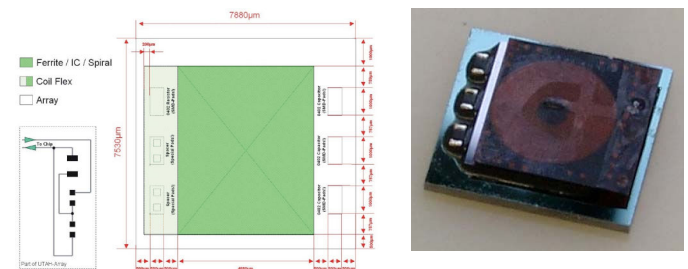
Schematic of the dimensions of the package; the two spacers and the jumper on the left side can be used for single or double coil assembly, the circuit plan is shown on the bottom left side (left), light microscopy image of a fully assembled test module with mounted coil/ferrite (right).
